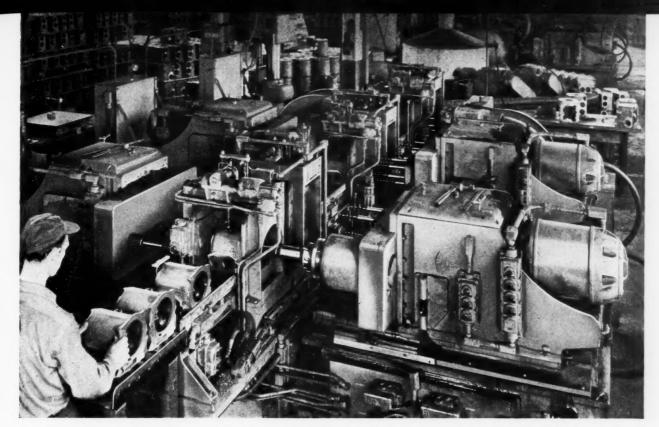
Loading end of a machining line consisting of two automatic transfer machines, separated by a six-station "pancake" type rotary-indexing machine
